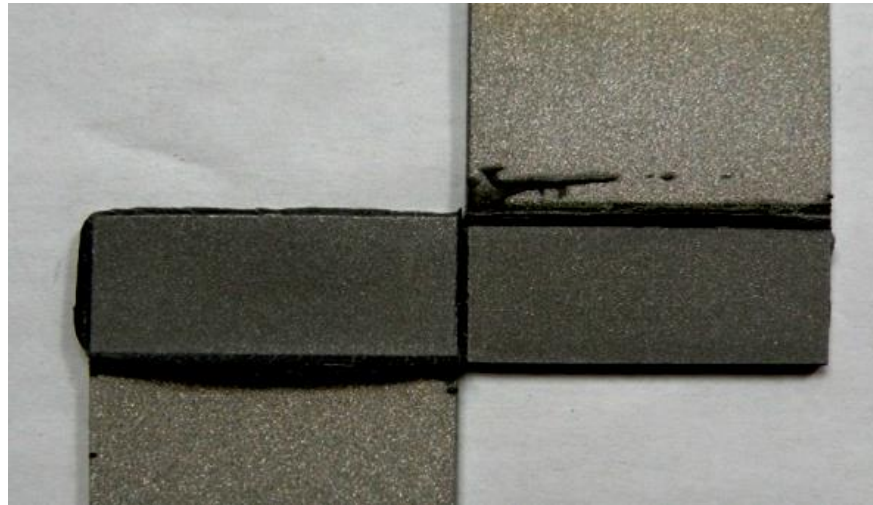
Typical fracture surfaces of the sand blasted single-lap joint aged for 3 weeks at room Temperature and at 10% load of the initial joint strength.
